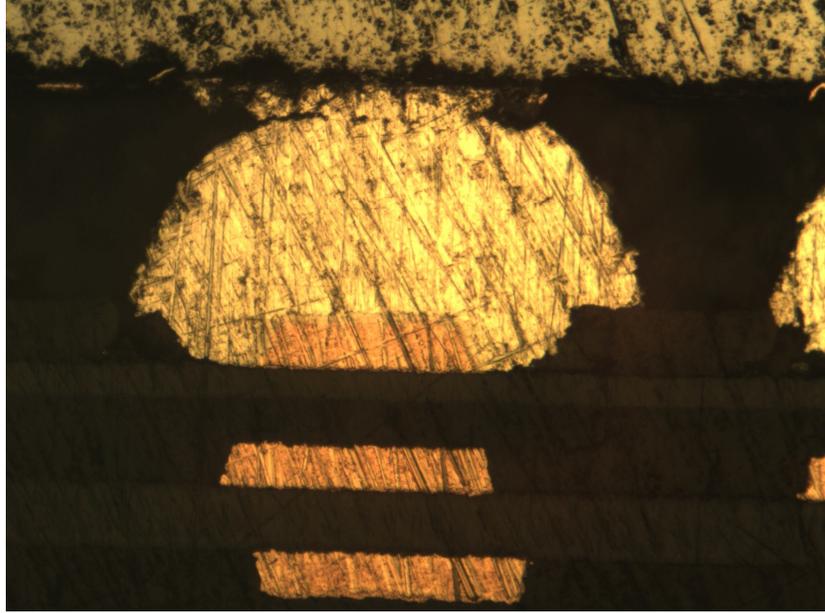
Hot Melt 1 on FR4 Test Board CSP Image
